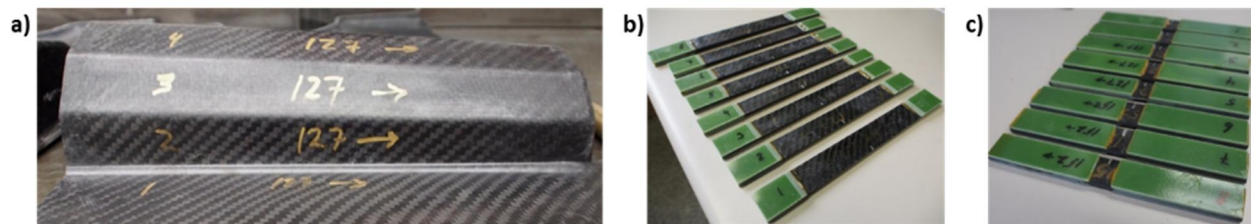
Coupons were cut from the flats of the crush can for mechanical testing. a) The crush can with the upper and lower flanges removed and future coupons labelled. b) Tensile coupons. c) Compression coupons
